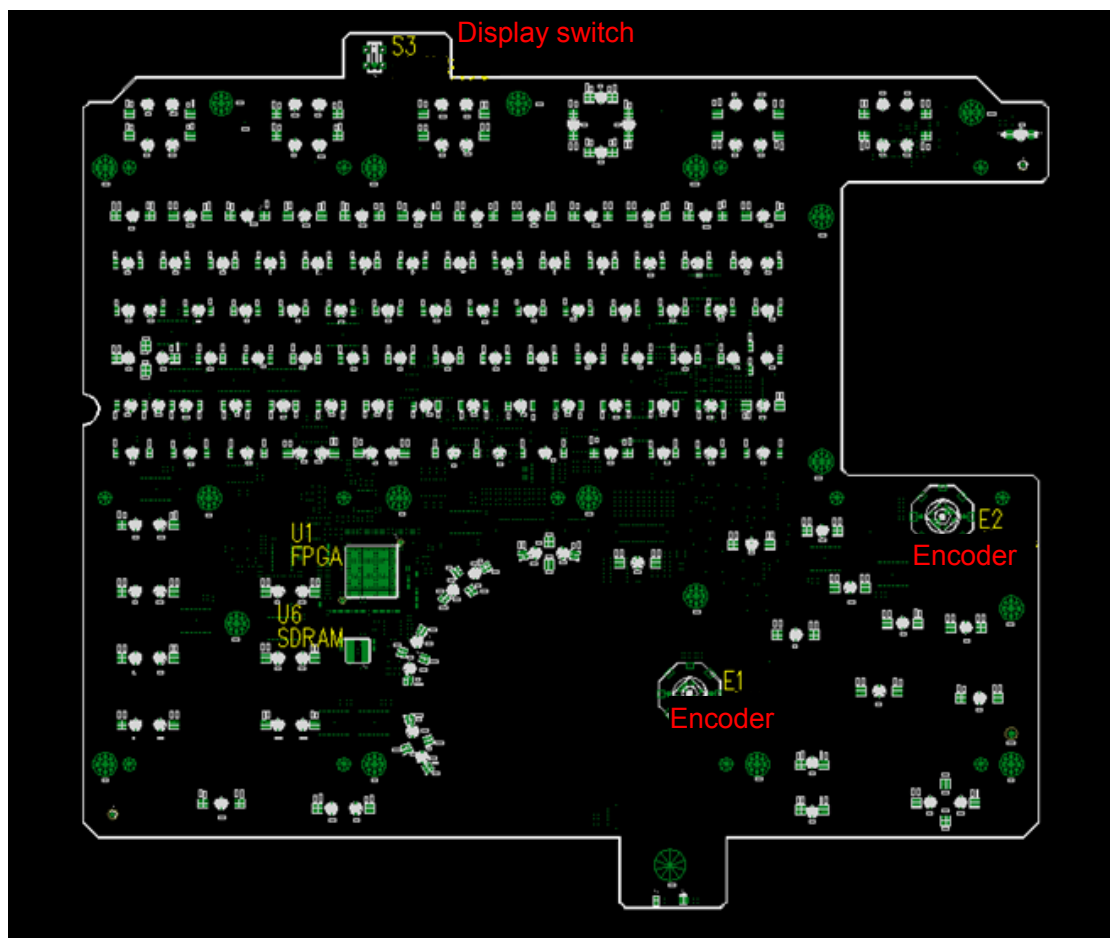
Components Layout of the Control Panel Board (Frontal)
